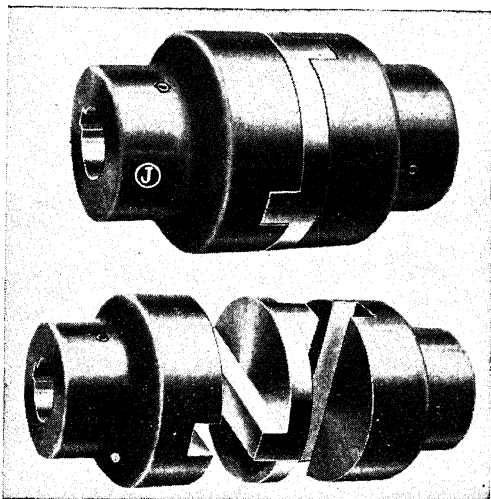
Oldham coupling. (W. A. Jones Foundry & Machine Co., Chicago, Ill.)
